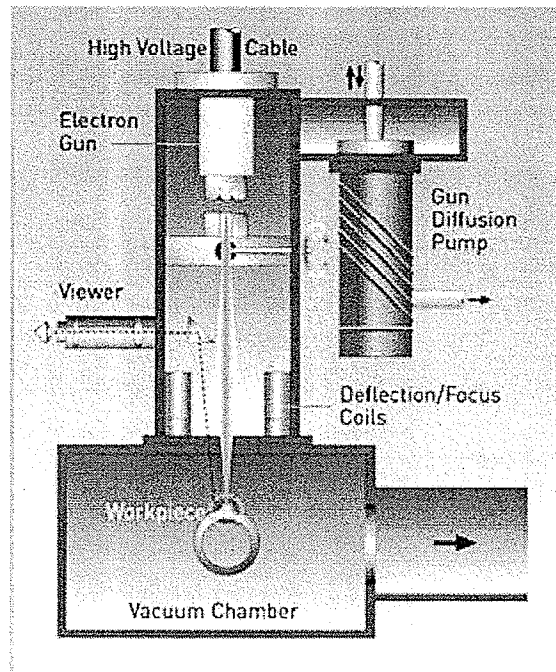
Schematic diagram of electron-beam welding process
